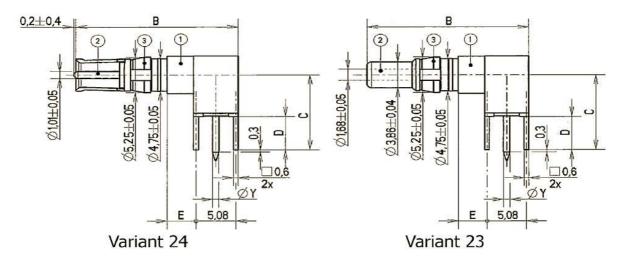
(b) - STRAIGHT AND 90° PCB TYPES
